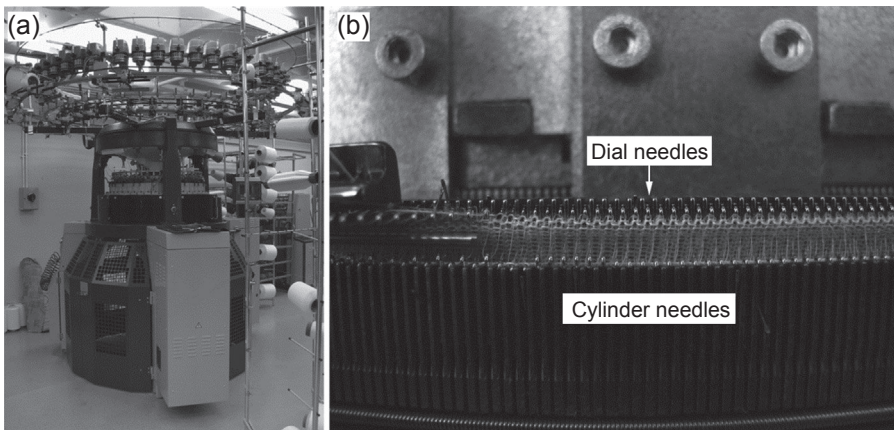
Producing a spacer fabric on a circular weft-knitting machine: (a) a Terrot double-jersey circular machine; (b) knitting a spacer fabric on the circular machine.
